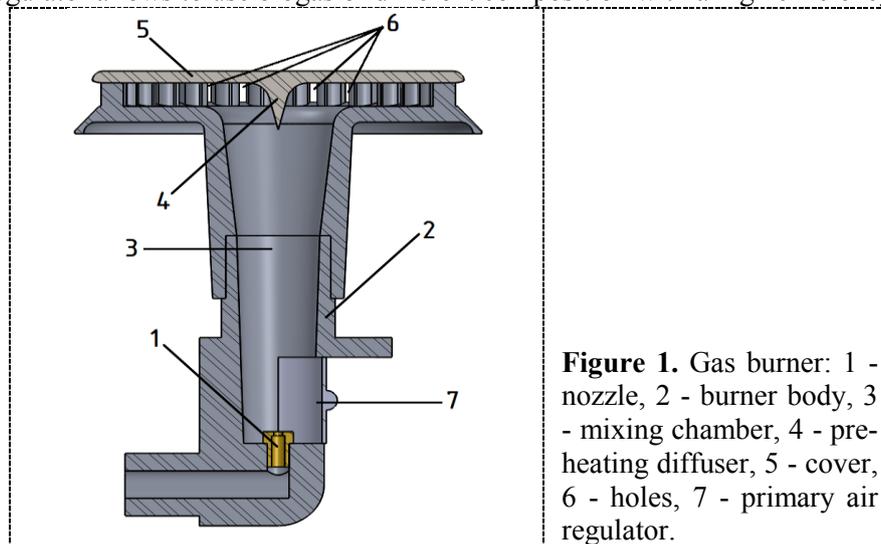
Gas burner: 1 - nozzle, 2 - burner body, 3 - mixing chamber, 4 - pre-heating diffuser, 5 - cover, 6 - holes, 7 - primary air regulator.
